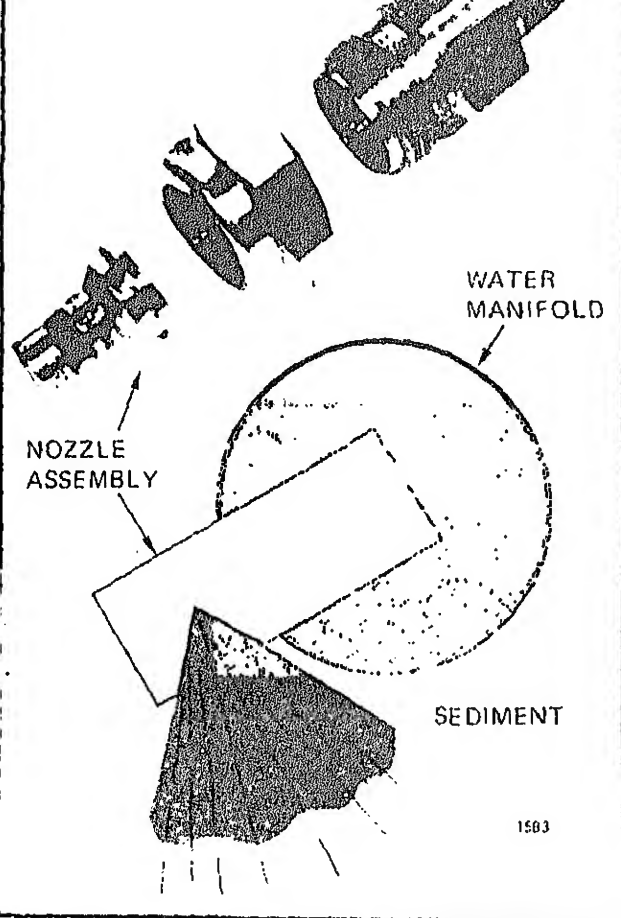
CLEANING MANIFOLD AND NOZZLES.
